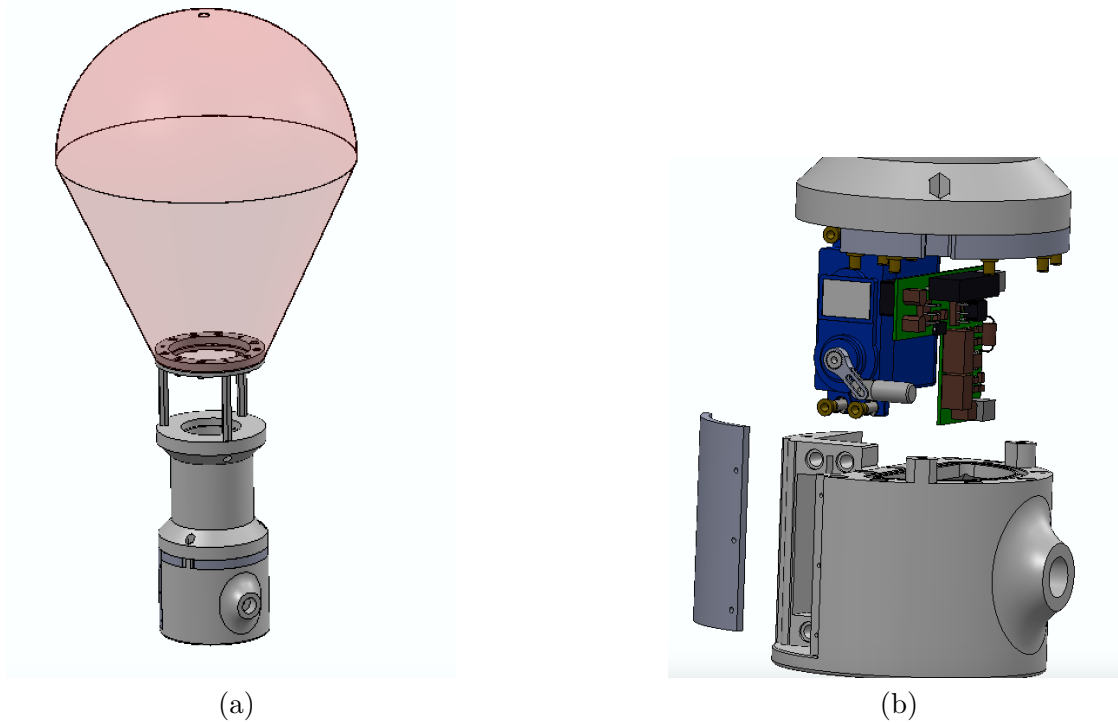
Assembly of the liftbag and exploded view of the respective releasing mechanism. Photo credit: PoliTOcean mechanical team
